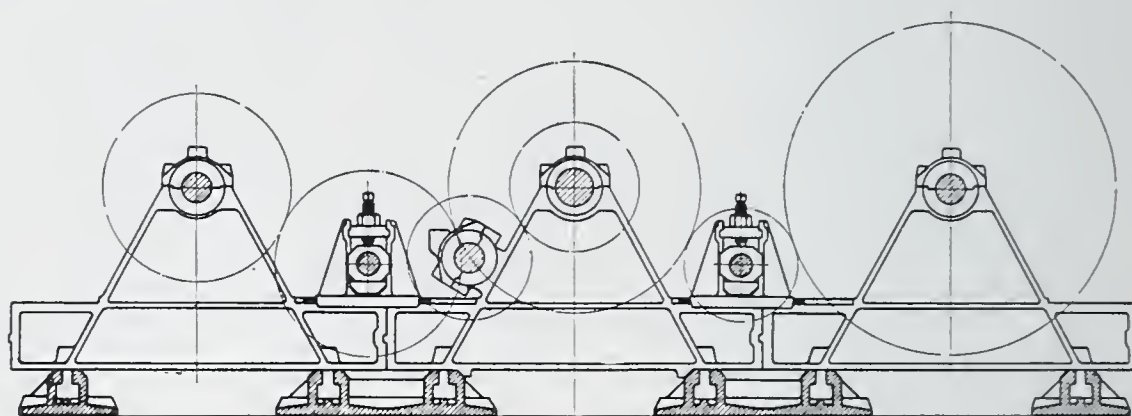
Elevation of Bearings for Spur-Gear Drive, on Line *BB* of Fig. 1.
